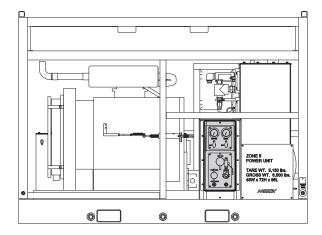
Hydraulic Bulkhead Panel Location
